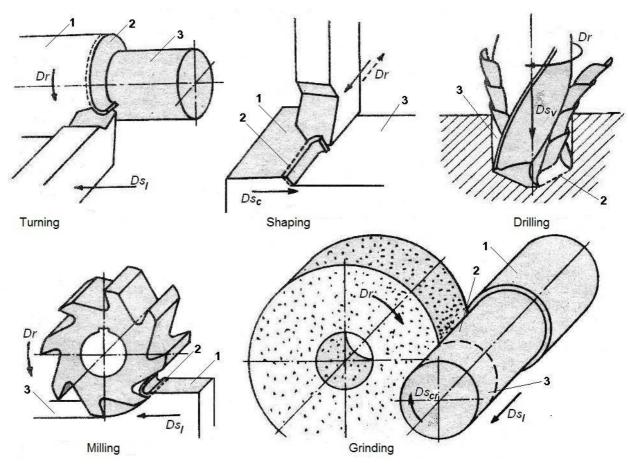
Schemes of machining: 1 – processed surface, 2 – cutting surface, 3 – finished surface
